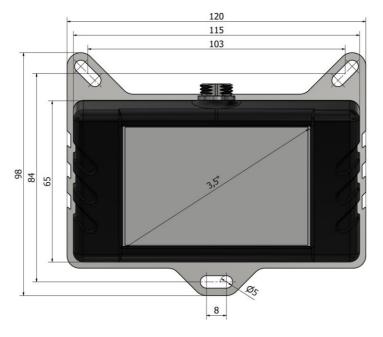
Appearance of the DCV2 controller with dimensions and mounting holes
